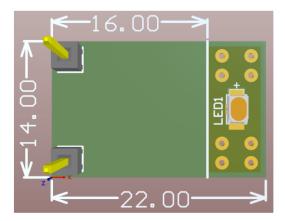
geometrical requirements for the PCB (dimensions in millimeters)
